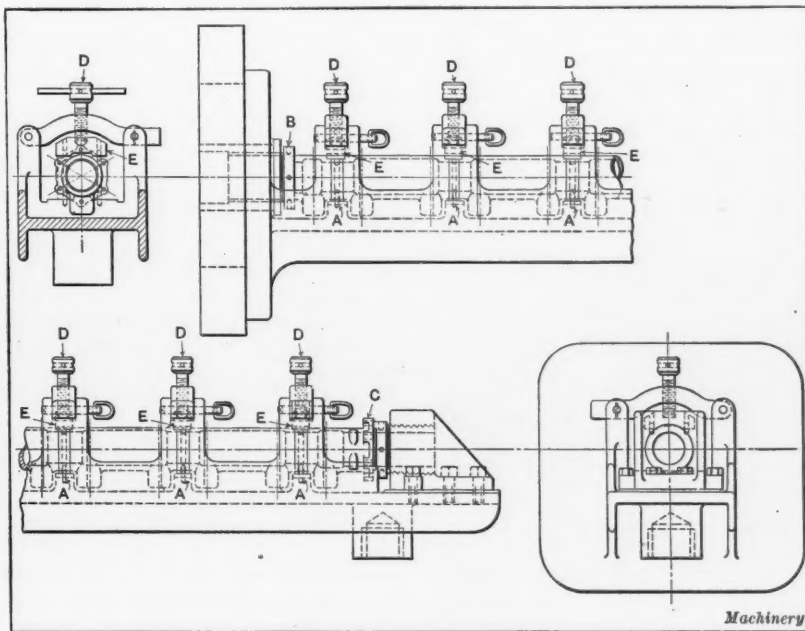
Work-holding Fixture used on the Broaching Machine for finishing Bearings of the Cam Frame shown in Fig. 19
